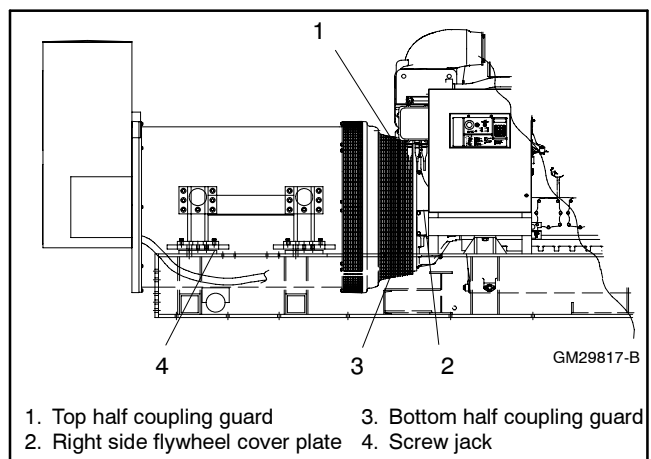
2000-2800 kW Assembly Drawing, Typical
